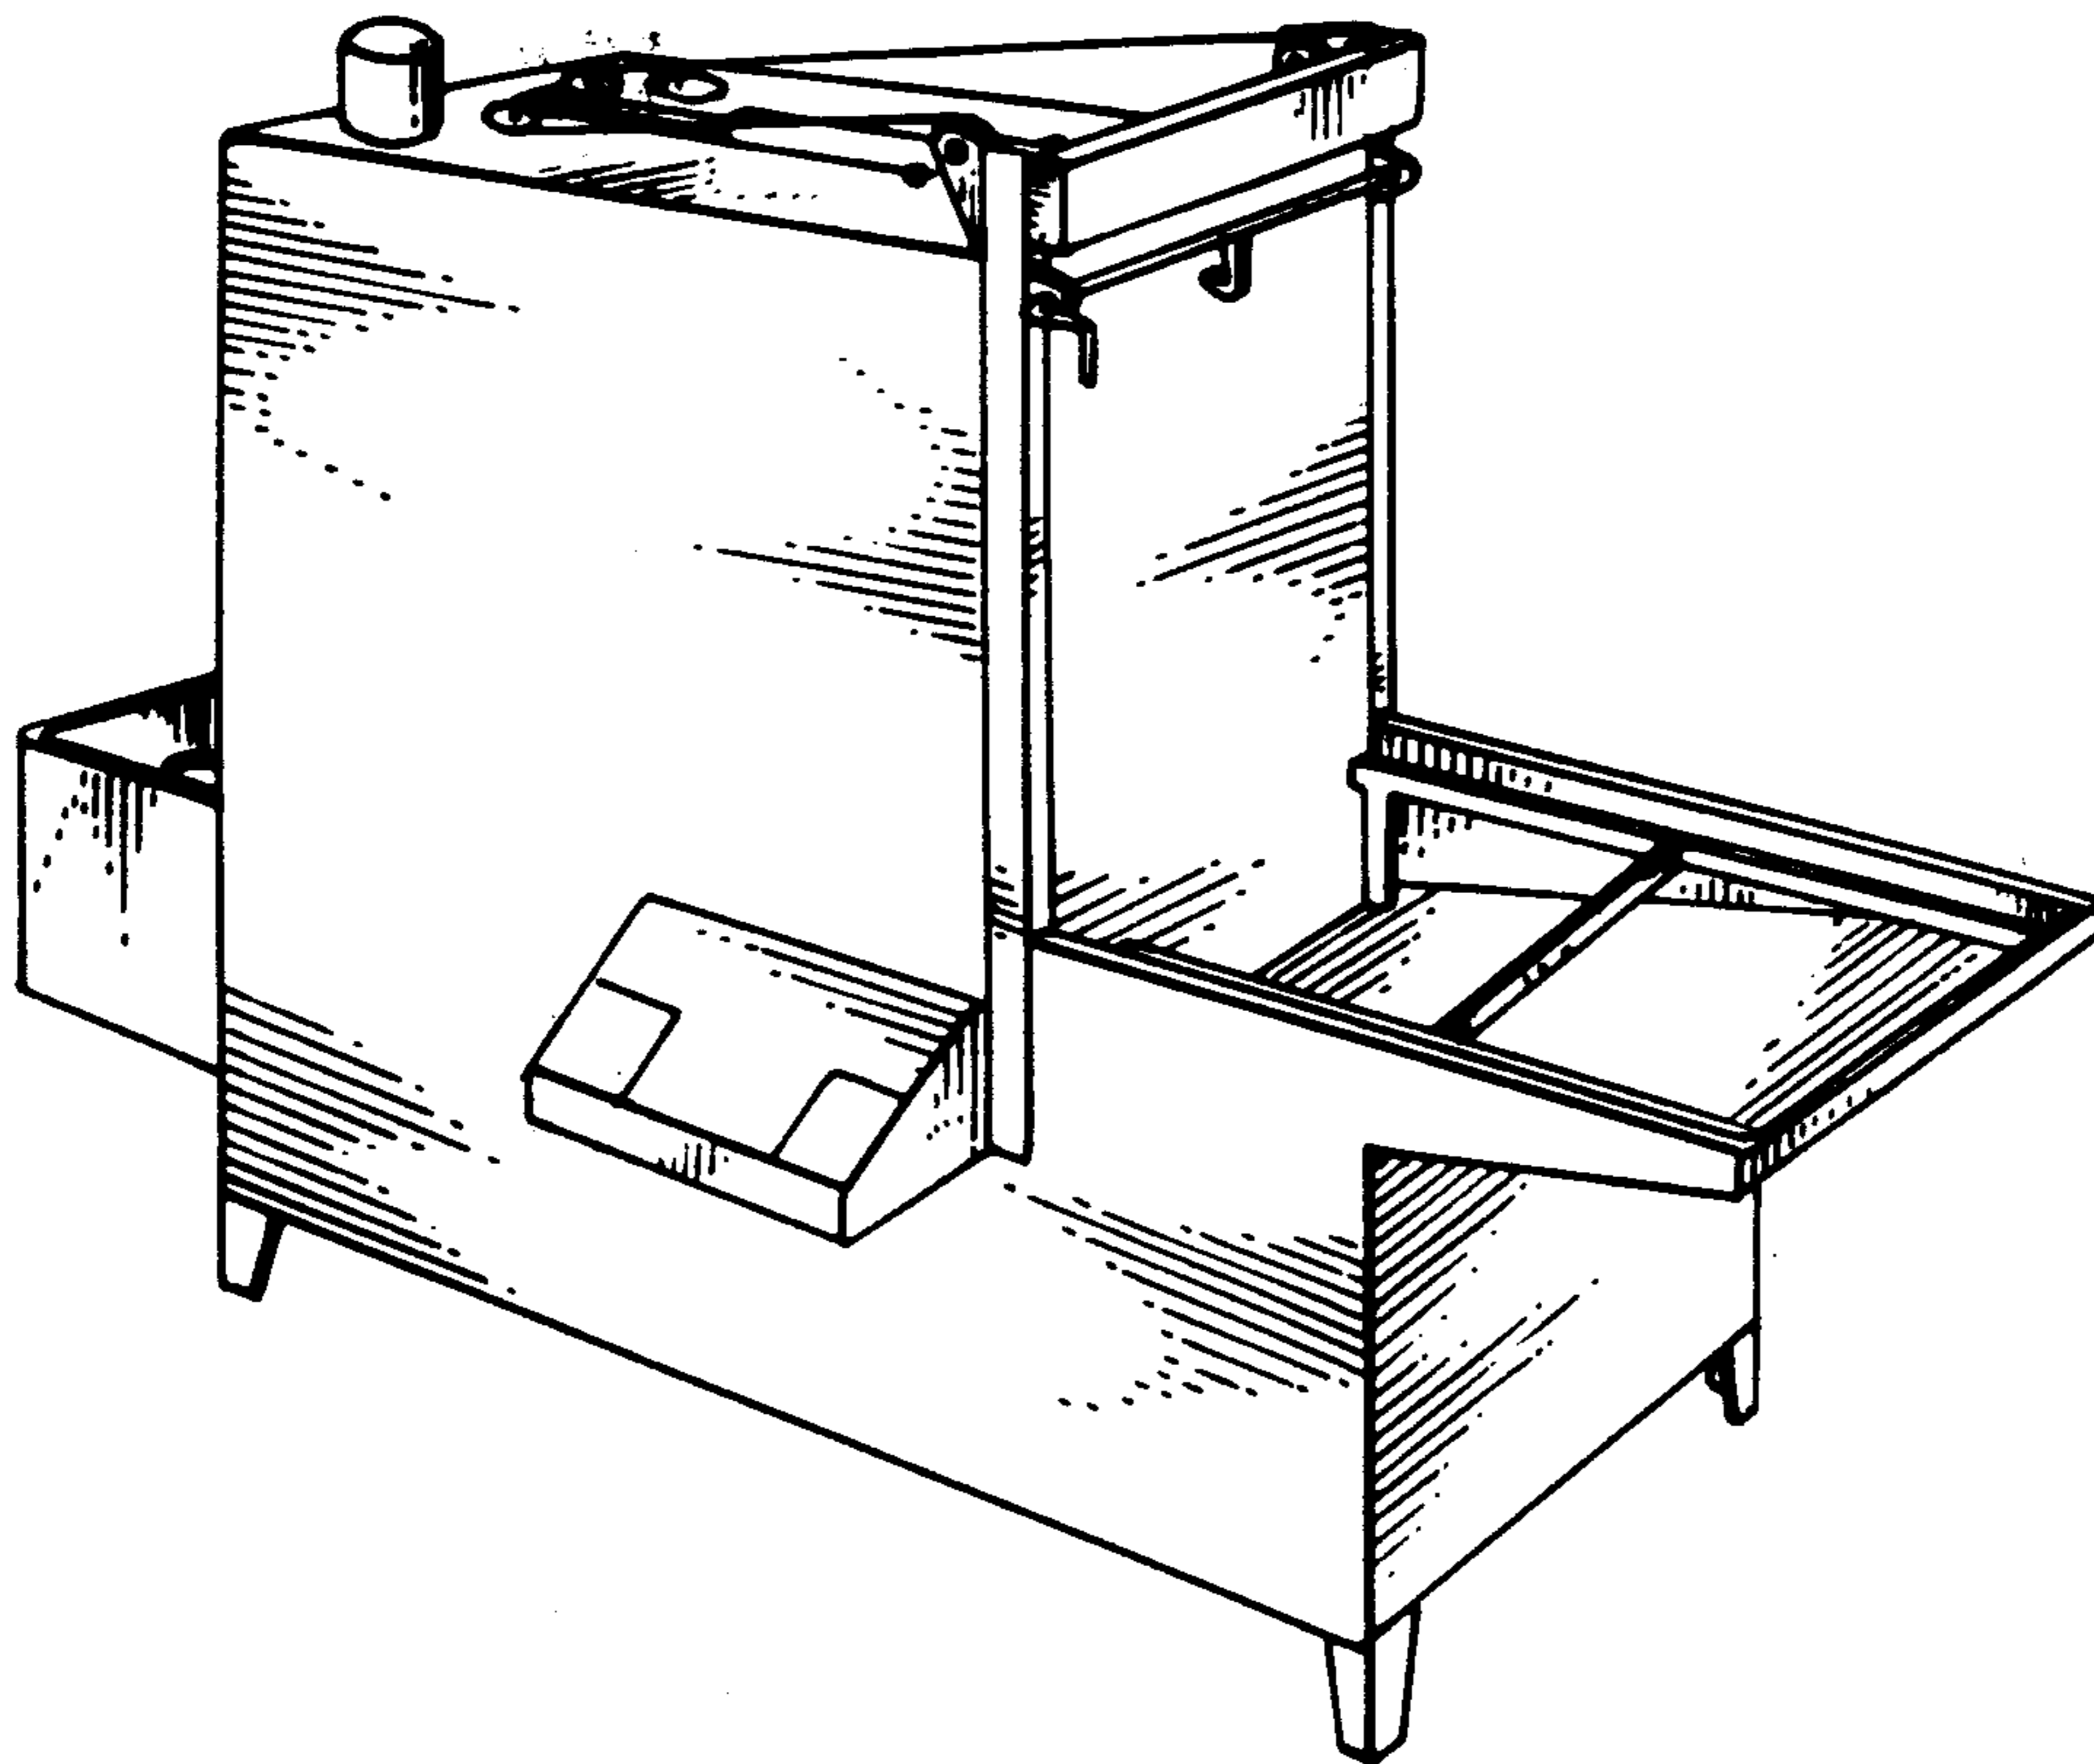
is a perspective view of a parts cleaning and de-greasing machine, showing my new design;
